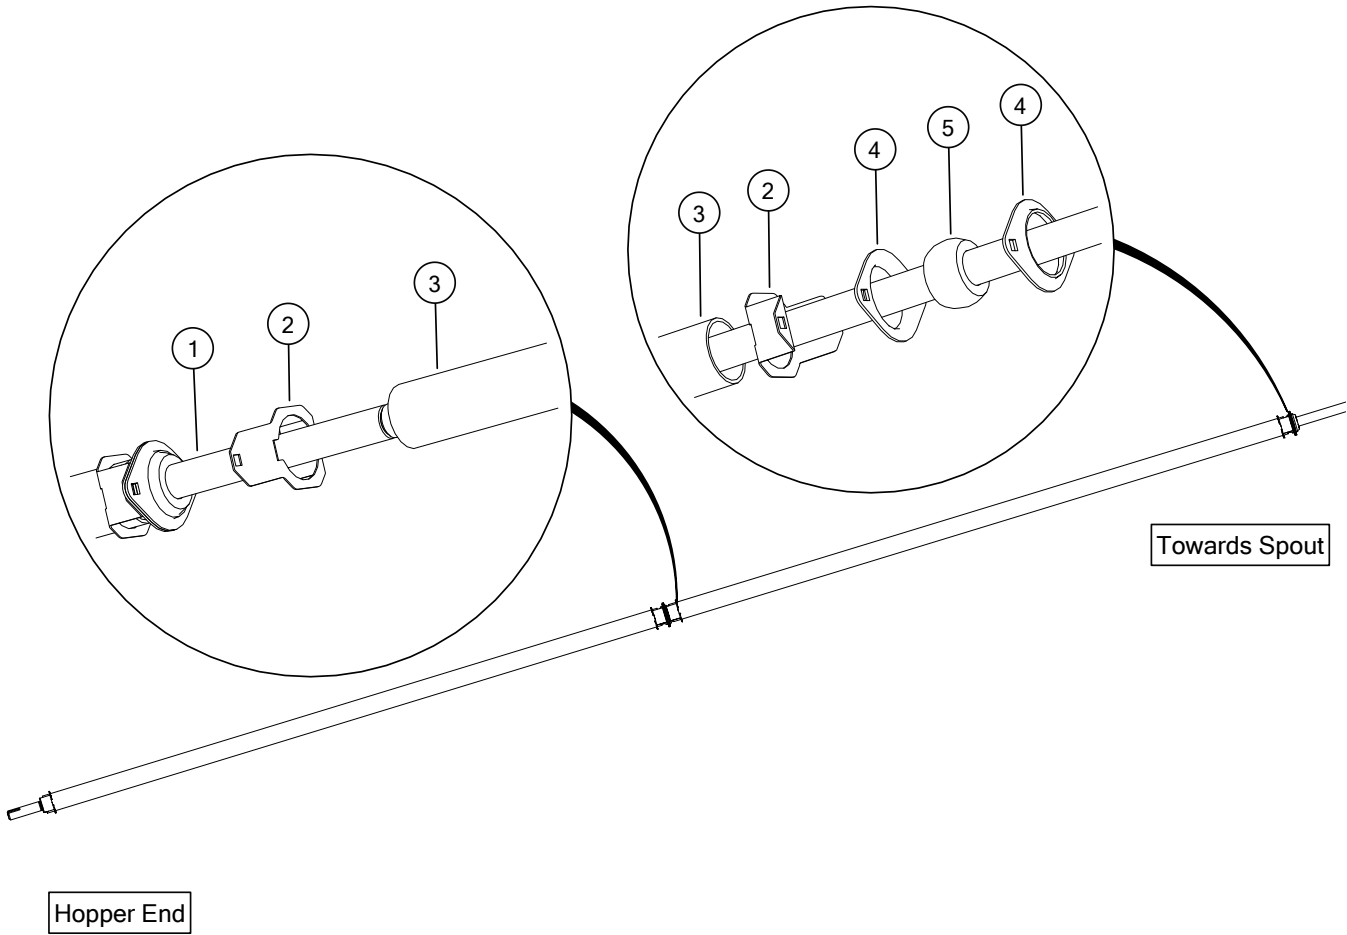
Installing the Bearing and Bracket Assemblies and the Shaft Guards
